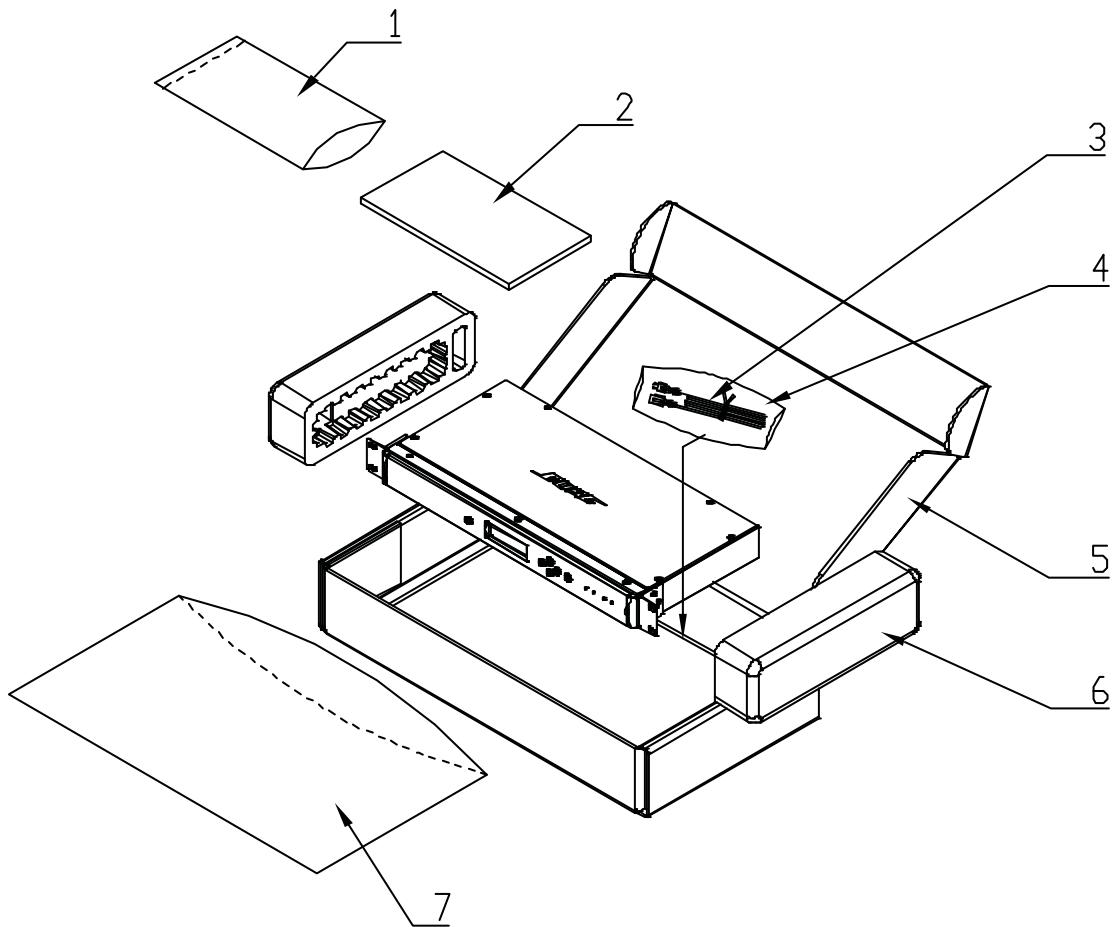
ControlSpace SP-24 Sound Processor Packaging View
